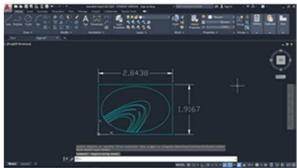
Sketching Process of Workpiece Drawing Using AutoCAD
